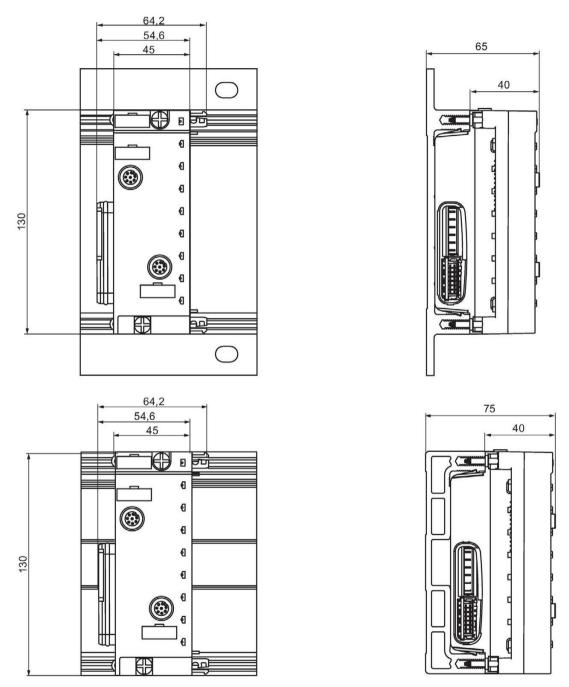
Dimension drawing of electronic module with CM IO 2xM12 connection module
